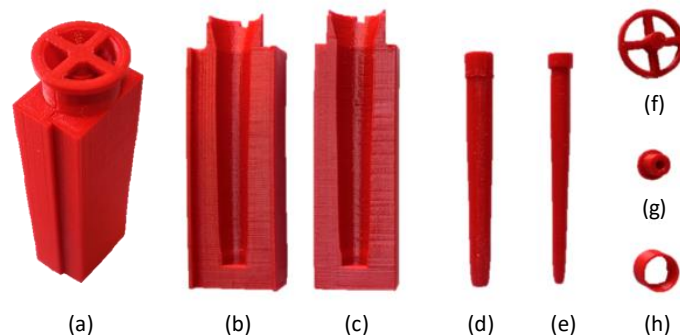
3D printing parts for the construction of the actuators. (a) to (f) mould parts; (g) and (h) actuator parts.
